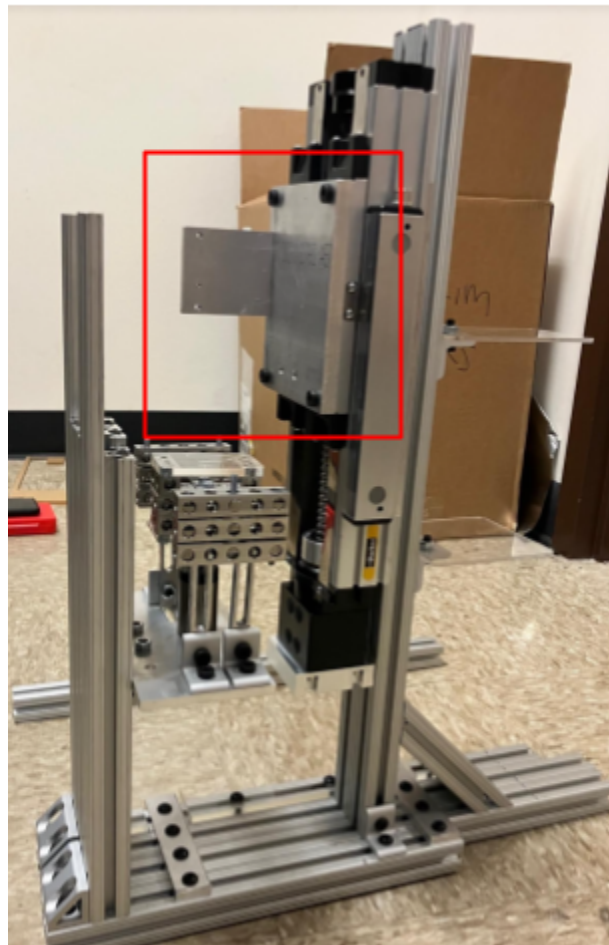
Machined and Assembled Laser Distance Sensor Mount.
